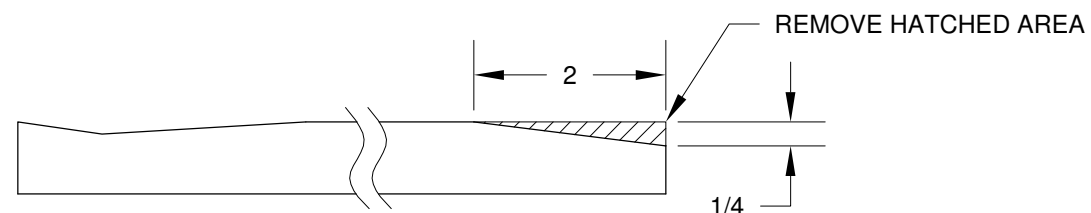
MODIFYING THE EMPENNAGE BUCKING BAR
